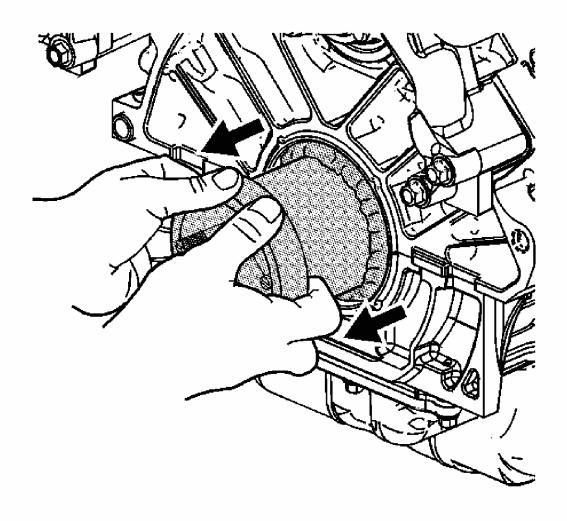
Removing Rear Seal Applicator Housing Courtesy of GENERAL MOTORS CORP.
